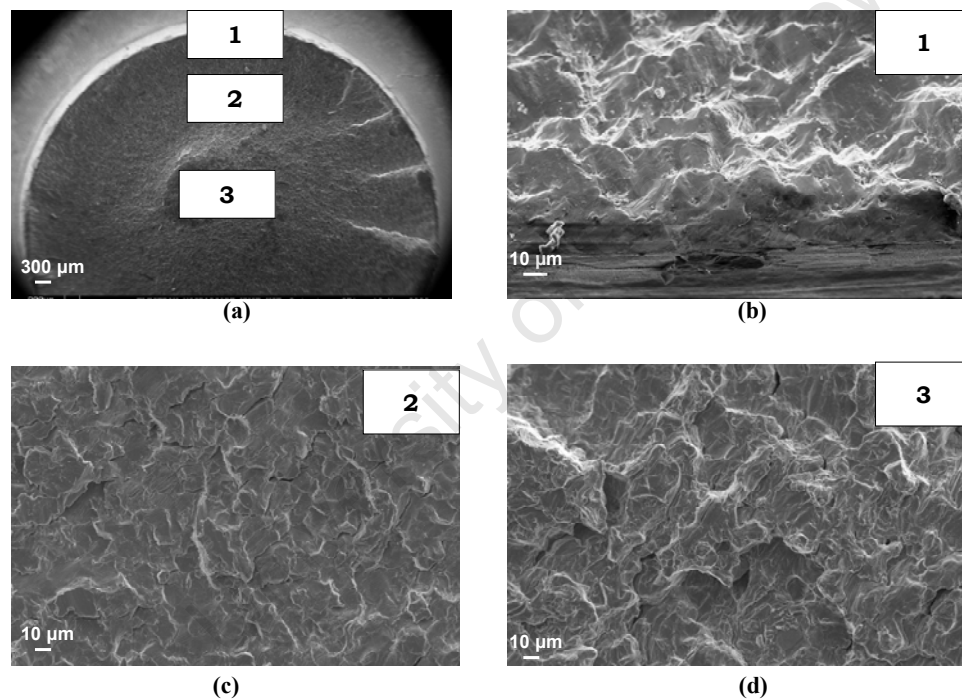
Fatigue fracture morphology of Ti-6Al-4V specimen that underwent Ox750/850Va. (a) overall fracture surface; (b) crack initiation zone; (c) crack propagation zone and (d) fast fracture zone
